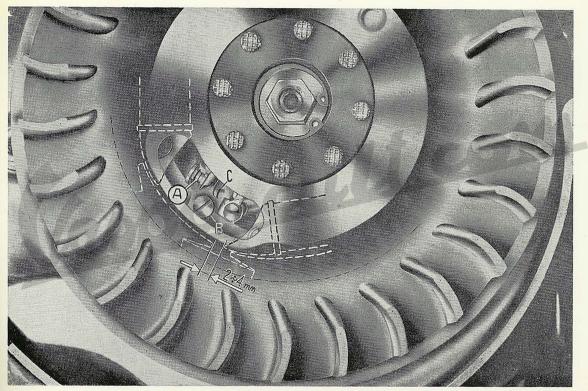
Operations for checking the «magnetic» timing of the flywheel.
